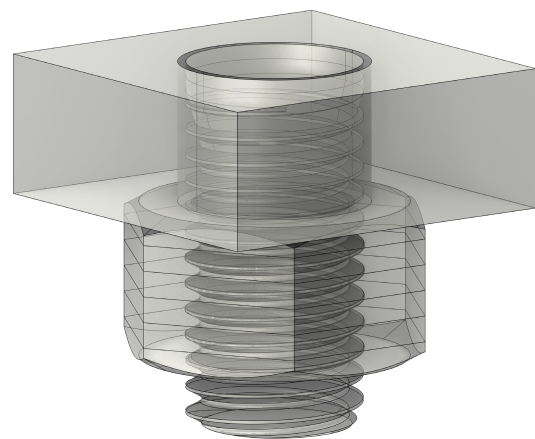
3D – bolt in an assembly with a nut and a mounting block with a through hole (transparent display)
